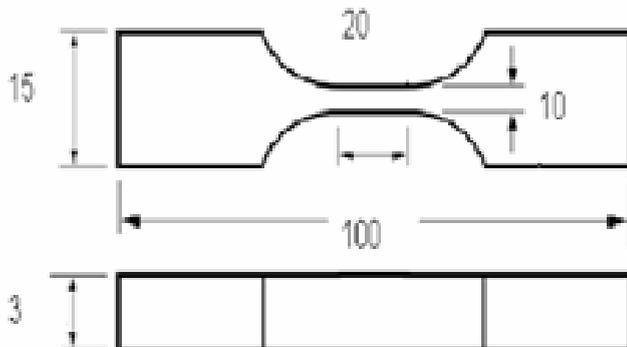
Dog-bone shaped tensile test specimen (dimensions in mm)
